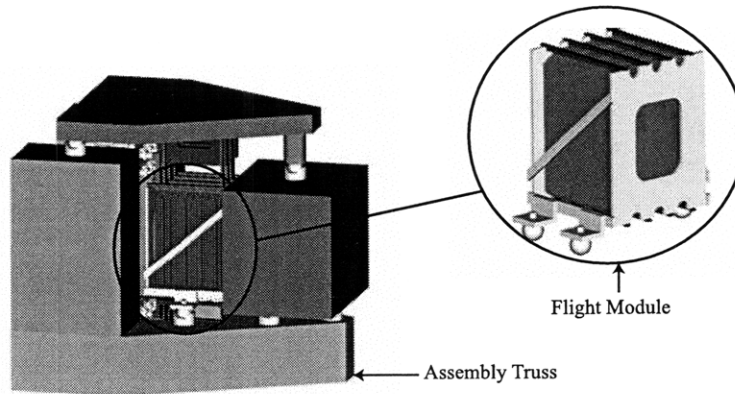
Flight module designed to loosely hold thin optics. The module is inserted in a precision assembly truss to accurately align the thin optics and glue them to the module.
